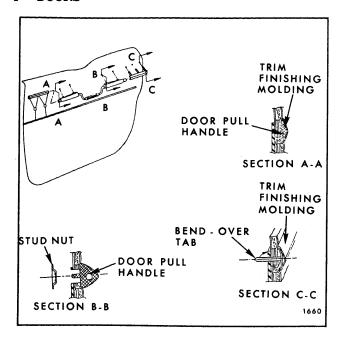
Door Pull Handle Installation - 38000 Series Shown - 39000 Series Similar
